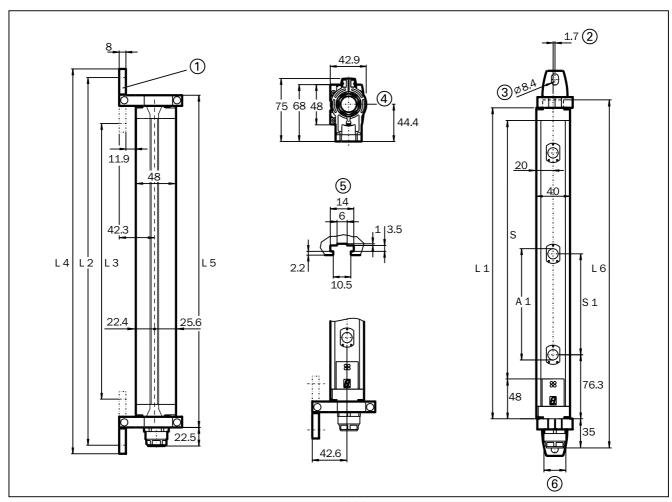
Dimensional drawings and mechanical detail, M 2000 Standard (sender; receiver is mirror-image), swivel mount
